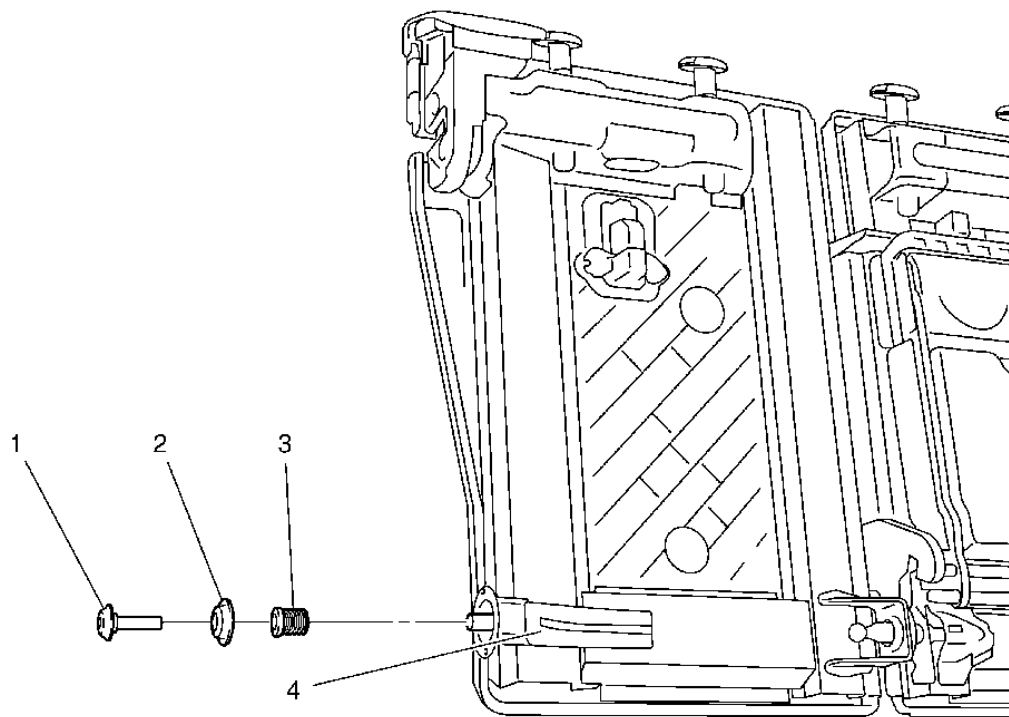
Rear Seat Back Cushion Pivot Support, Housing, Spring & Bolt
